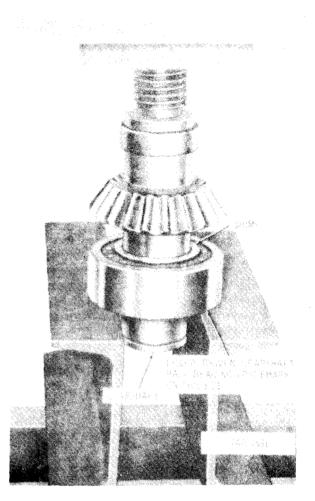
Pressing fan driven gearshaft into lower gearshaft ball bearing.
